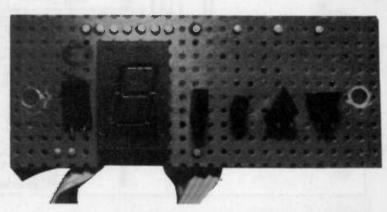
Printed circuit board component layout and full size copper foil master pattern for Board B. The display components are mounted on a separate plain matrix board, see photograph bottom right.
